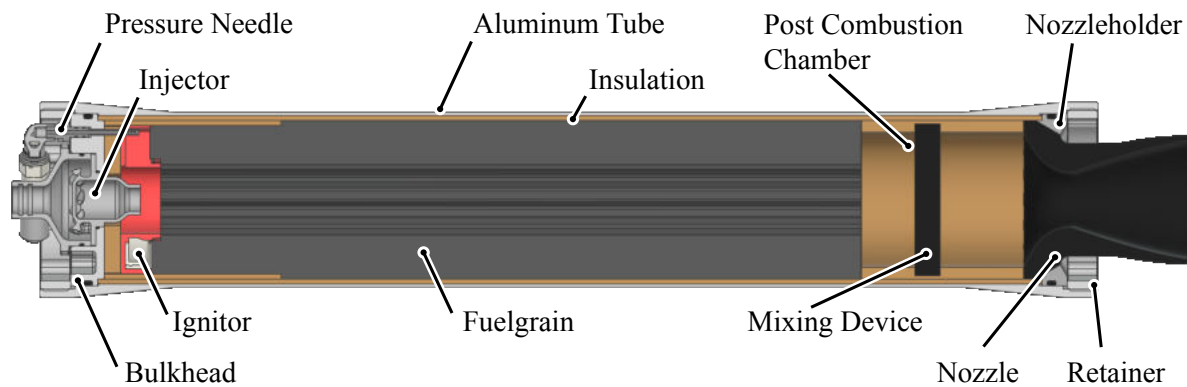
Depicted is the combustion chamber with its components. Starting from the left with the injector cover and the injector in the bulkhead held in place by a retainer. Then the ignitor on top of the fuel grain. After the fuel grain the post combustion chamber with the mixing device and at the end the nozzle with the nozzle holder and a retainer.
